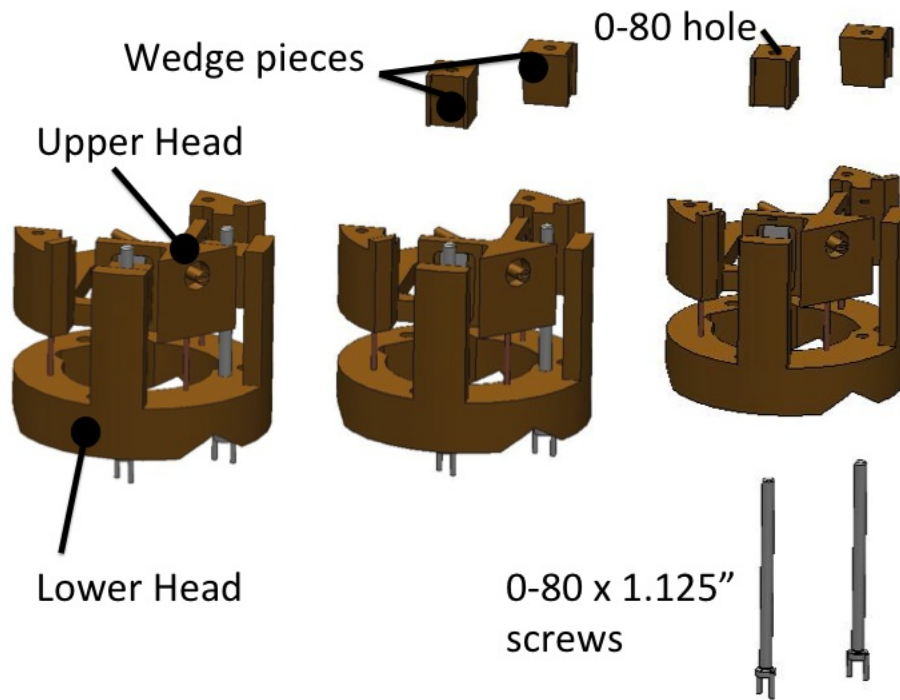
The coarse positioning system comprises of two 0-80 x 1.25" screws that can be driven by xy feed throughs. Each of the screws is screwed into the wedge piece. The wedges pieces move vertically when the screw is turned. This vertical movement translates to horizontal movement of the upper head. The screws are machined to have long prongs so that the flat head driver has enough contact at helium temperature even after thermal contraction.
